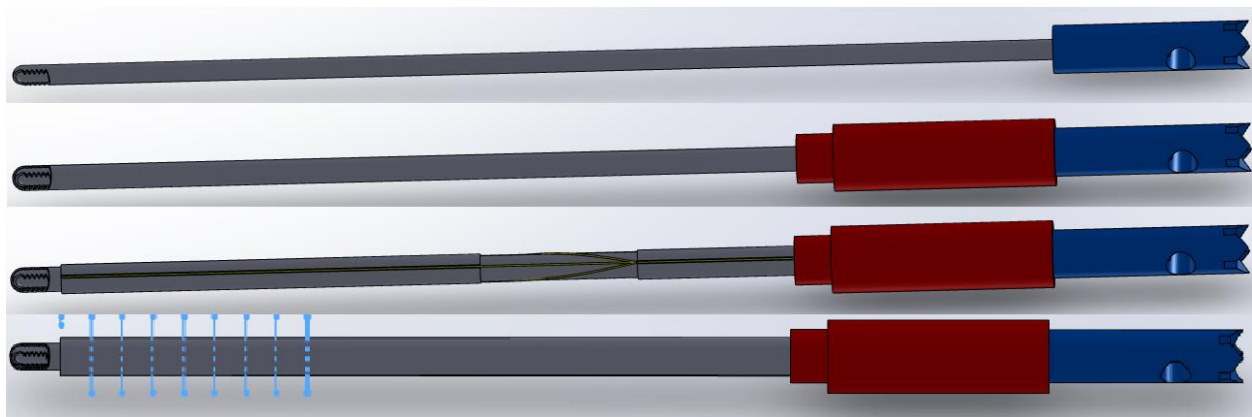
CAD shaver assembly view (top to bottom) inner shaver blade; outer shaver blade; sensor shaft; outer shaft.
